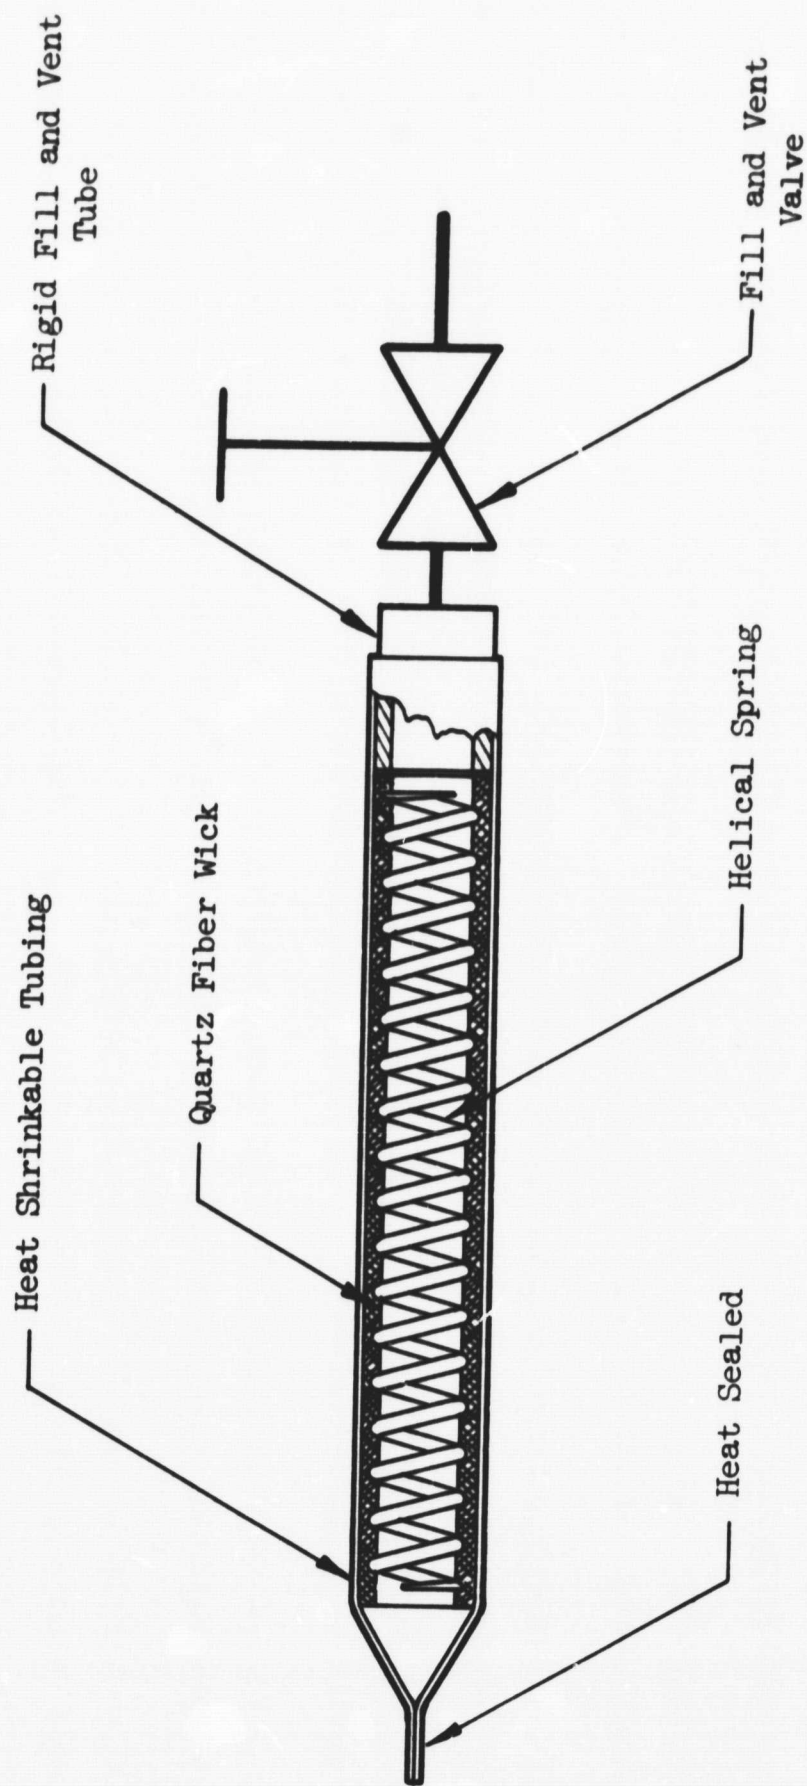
FLEXIBLE HEAT PIPE - SPRING SUPPORTED
